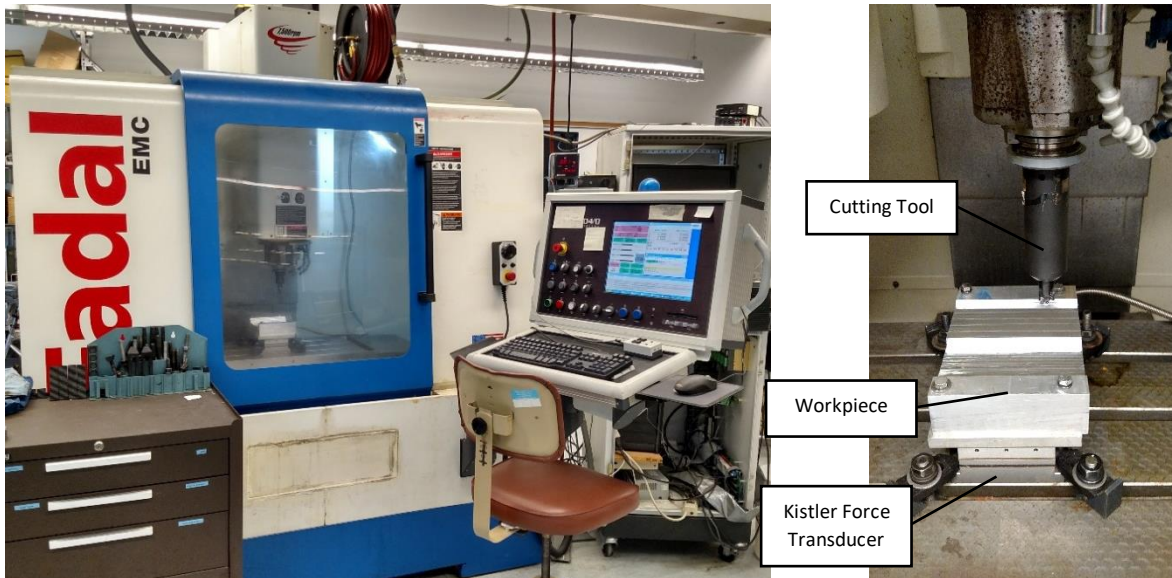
Fadal CNC milling machine. Overall setup (left) and close up of spindle and work piece mounted on Kistler force dynamometer (right).
